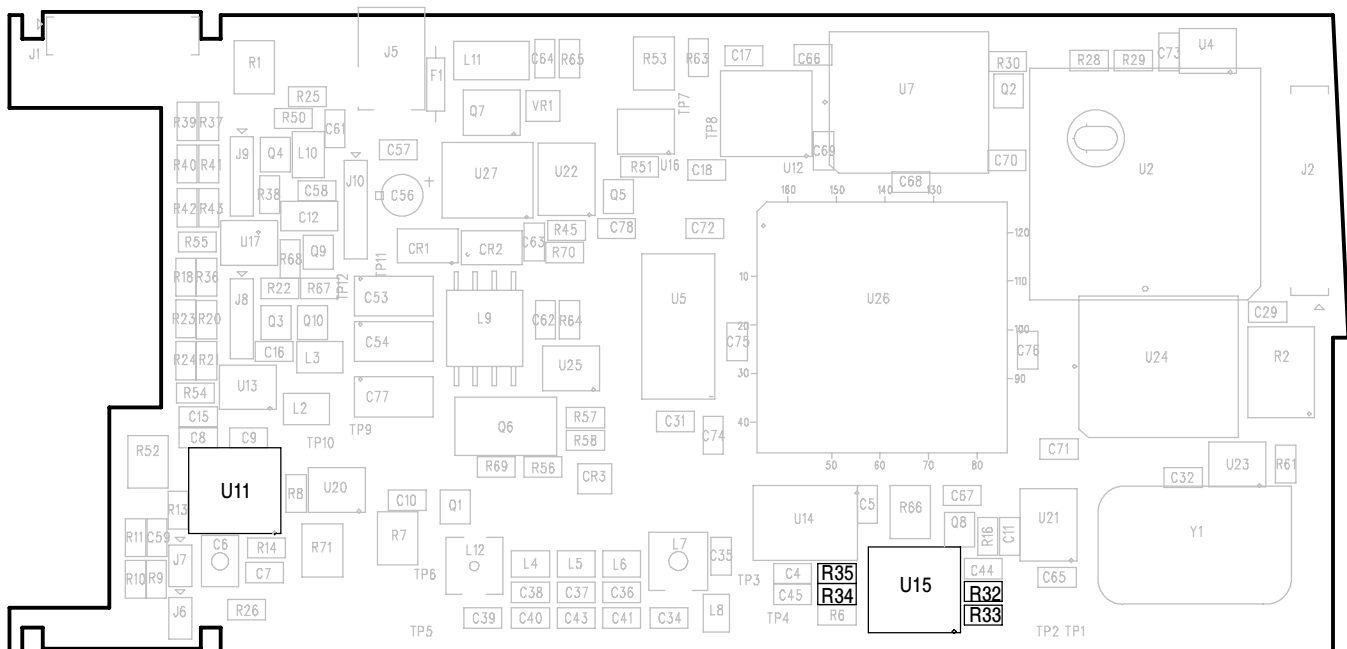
TSG90 Main board (all), TSG95 Main board (671-3353-00 to 671-3353-07)
